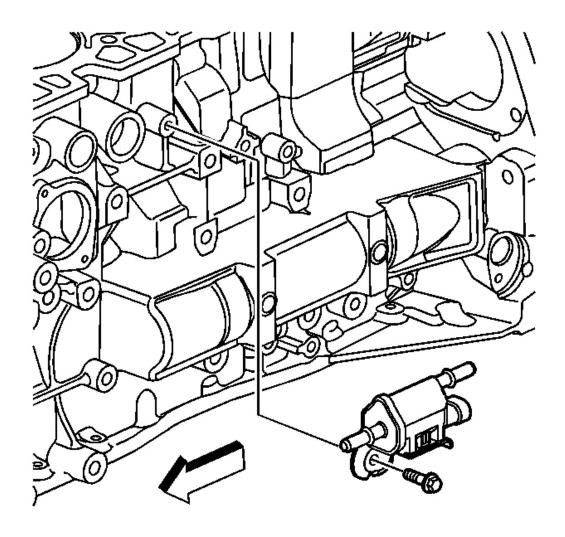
View Of EVAP Solenoid Courtesy of GENERAL MOTORS CORP.
